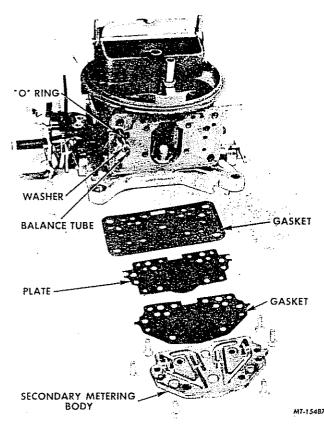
REMOVAL OR INSTALLATION OF SECONDARY METERING BODY (MODEL 4160)
